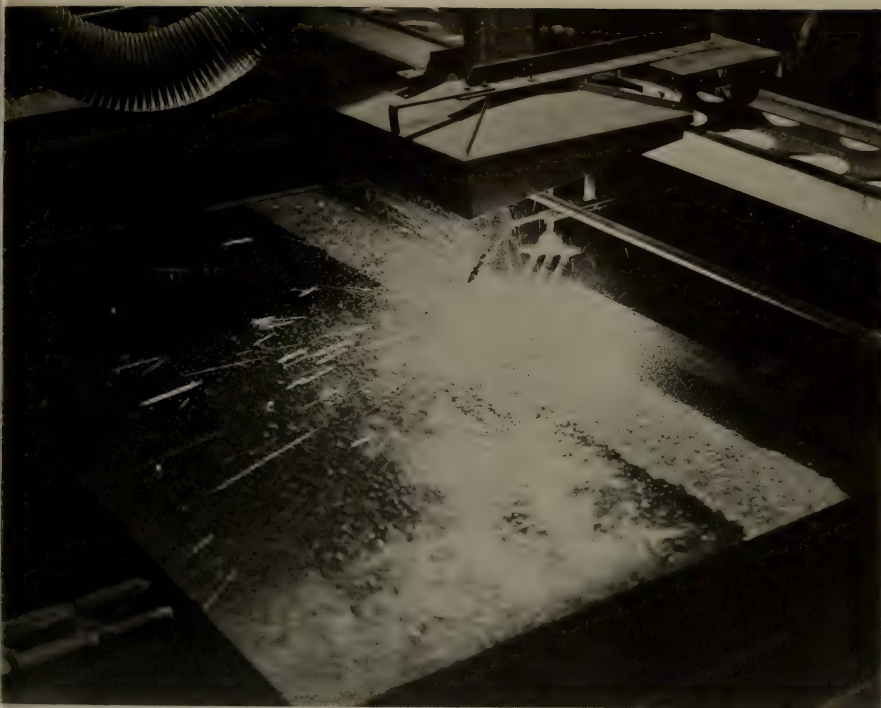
Flame-Texturing Granite. (*Courtesy, Cold Spring Granite Co.*)
